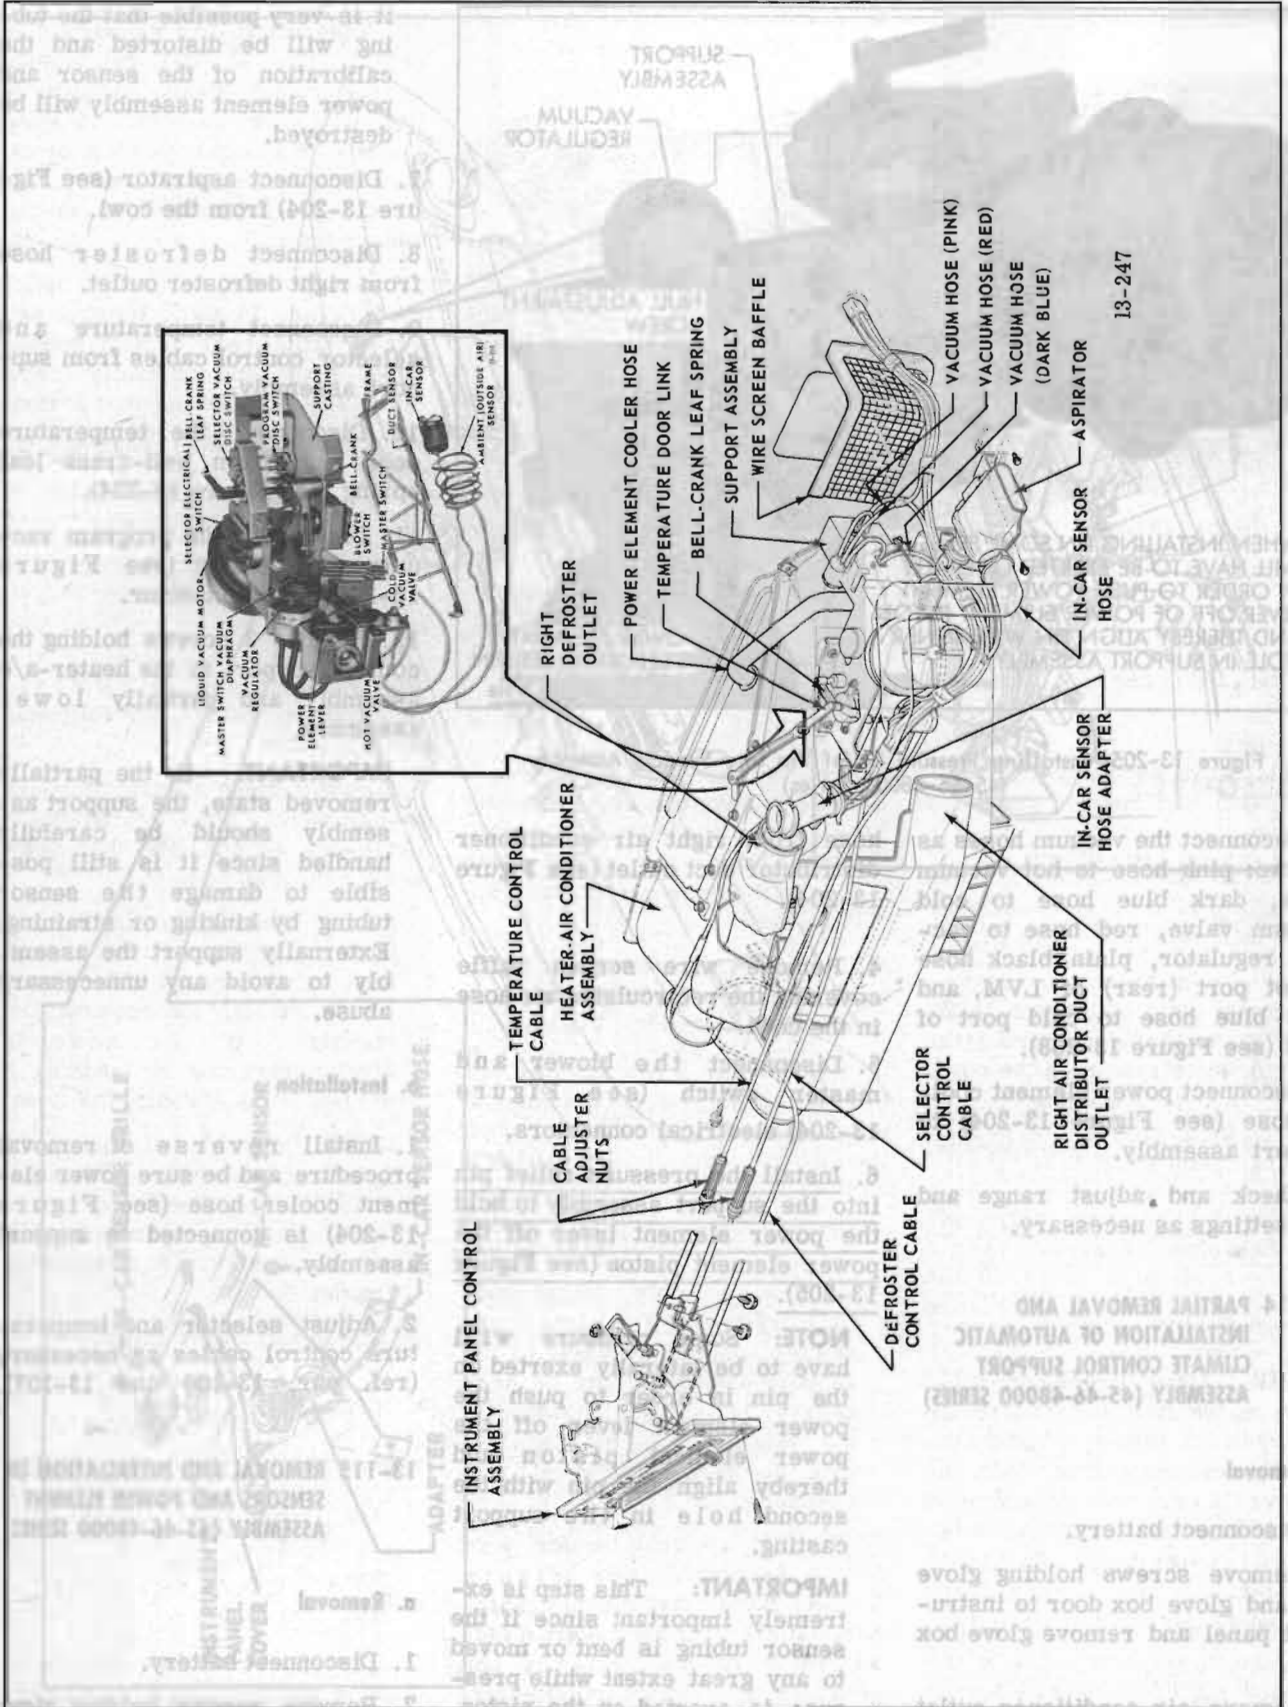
Support Assembly, Instrument Panel Control Assembly, and Heater-Air Conditioner Assembly Installation (45-46-48000 Series)
